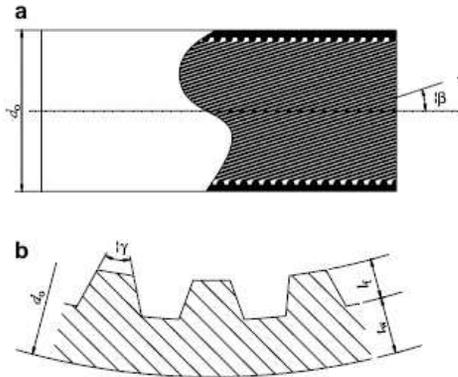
Sectional diagram of the tube with the internal spiral groove, a) cross sectional view (b) cross sectional drawing.
